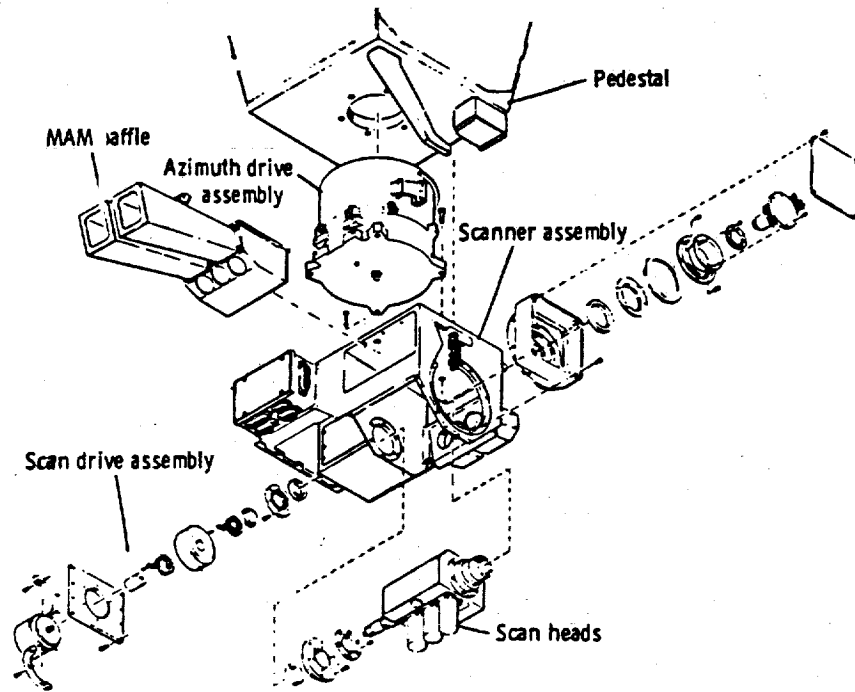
Exploded diagram of the mirror attenuator mosaic (MAM) assembly.
